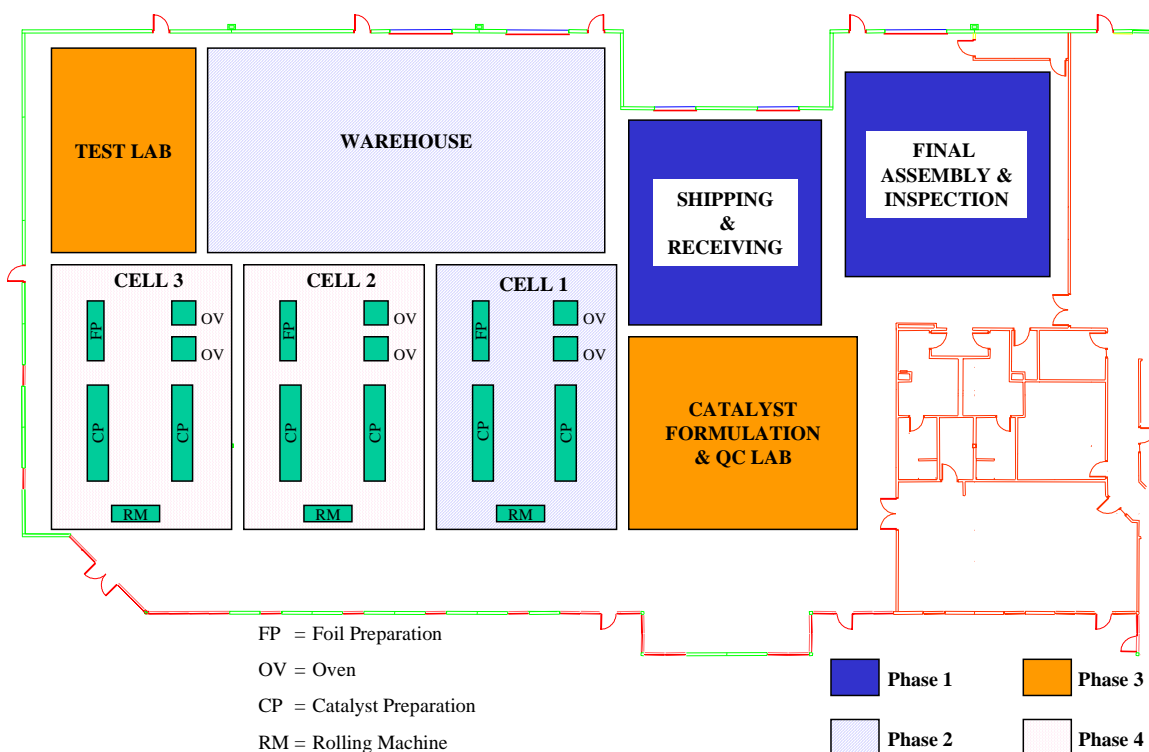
Floor plan of Catalytica Energy Systems, Inc. manufacturing facility in Gilbert, AZ
